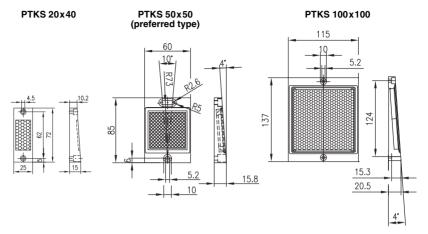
Dimensioned drawings for PTKS... reflectors
